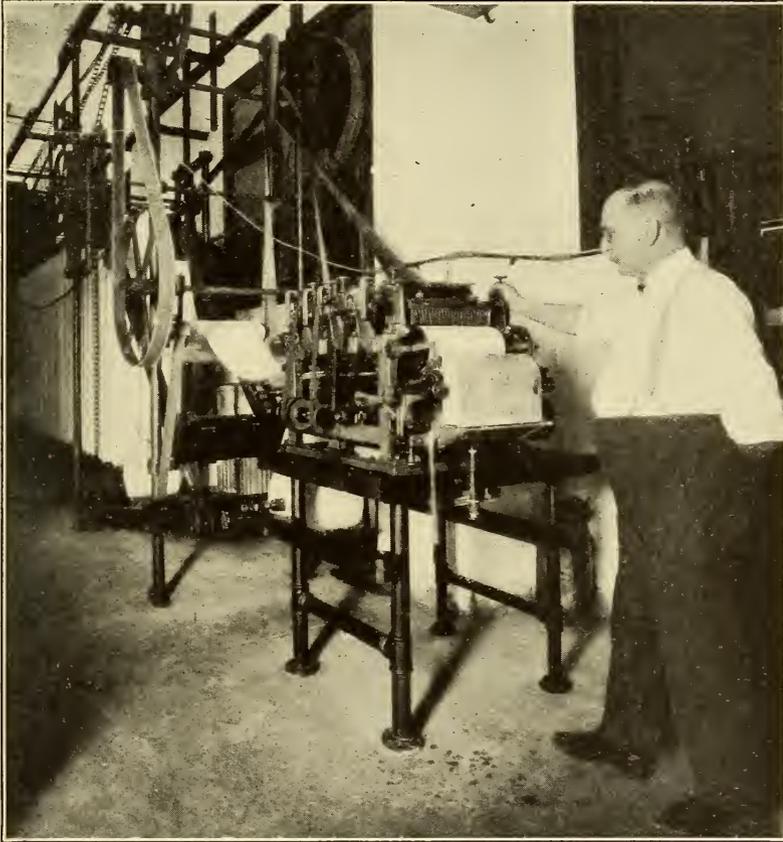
Paper coating machine with festoon dryers, Bureau of Standards
